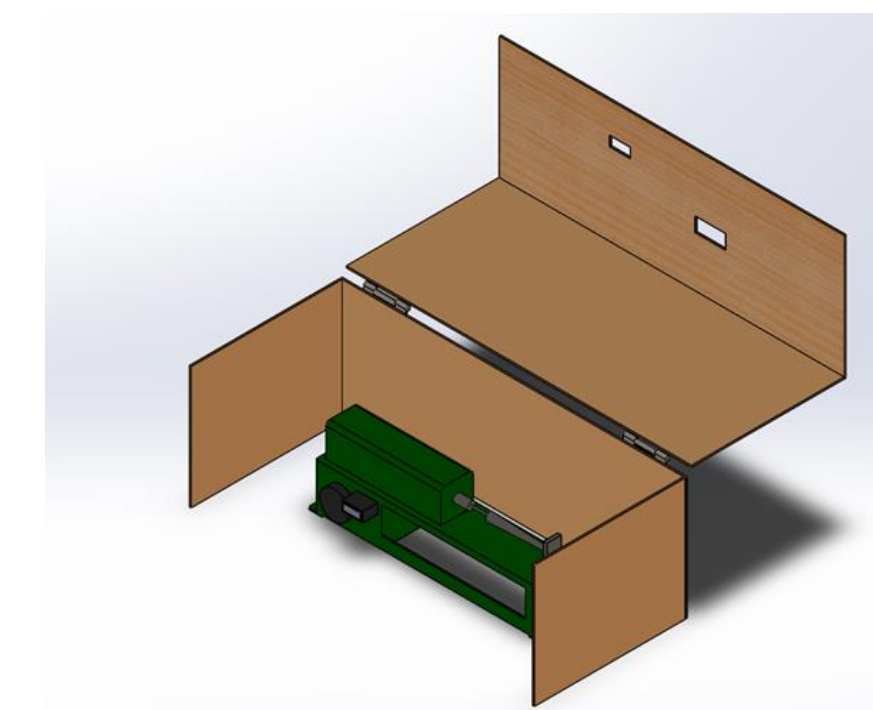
Final design with two sets of hinges (front and back of chamber) for full access to fatigue machine and ease of opening
